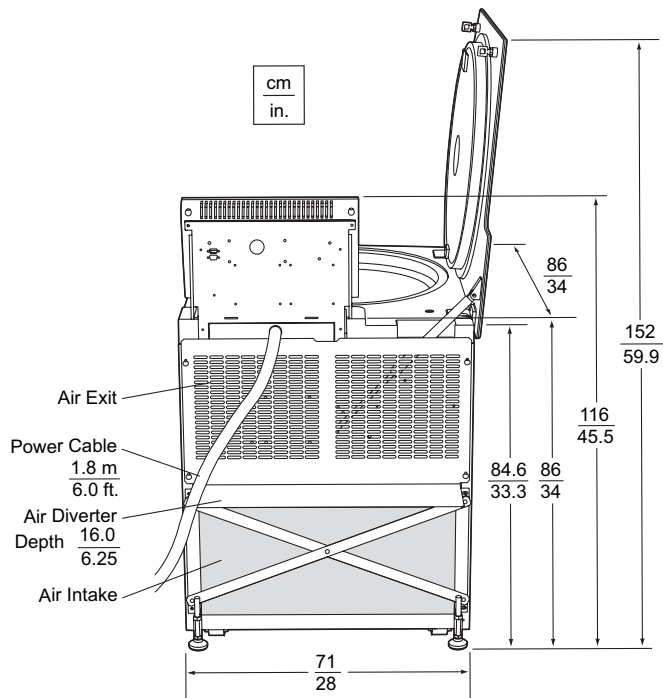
Rear View and Dimensions of the Avanti J-HC Centrifuge
